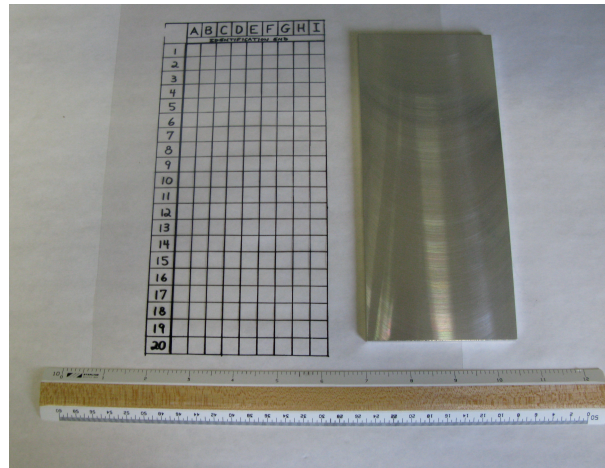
Optical photograph of an aluminum crack panel and the grid used to identify the detected crack locations.
